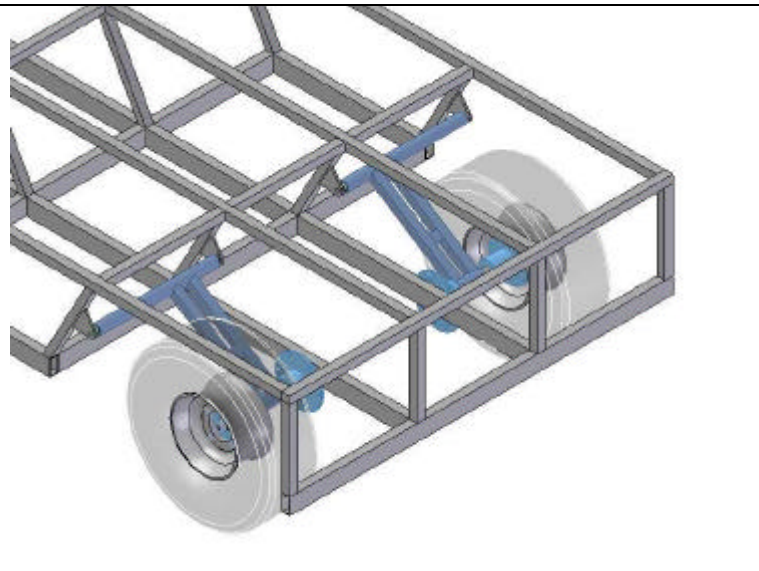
, left: Isometric view of entire trailing arm assembly, except springs & shocks.
